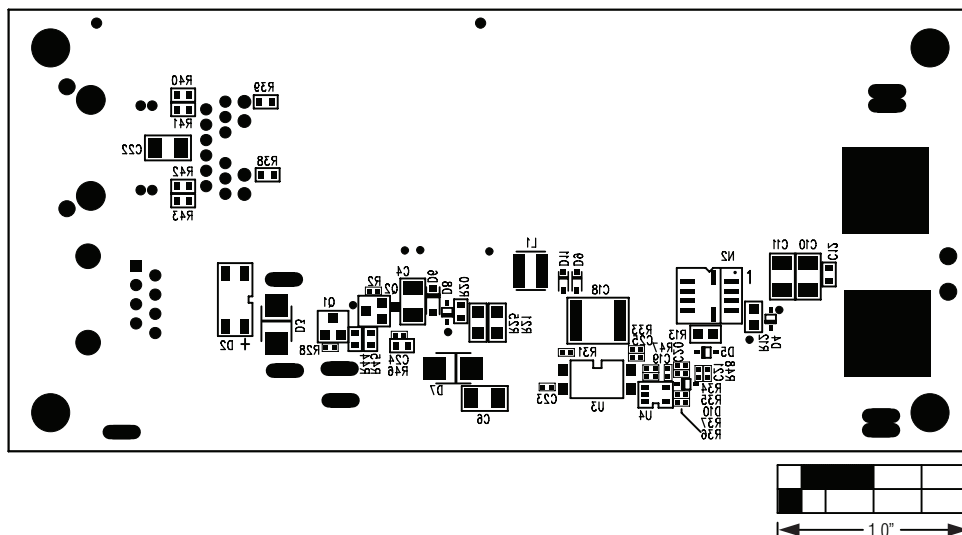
MAX5974C EV Kit Component Placement Guide—Solder Side
